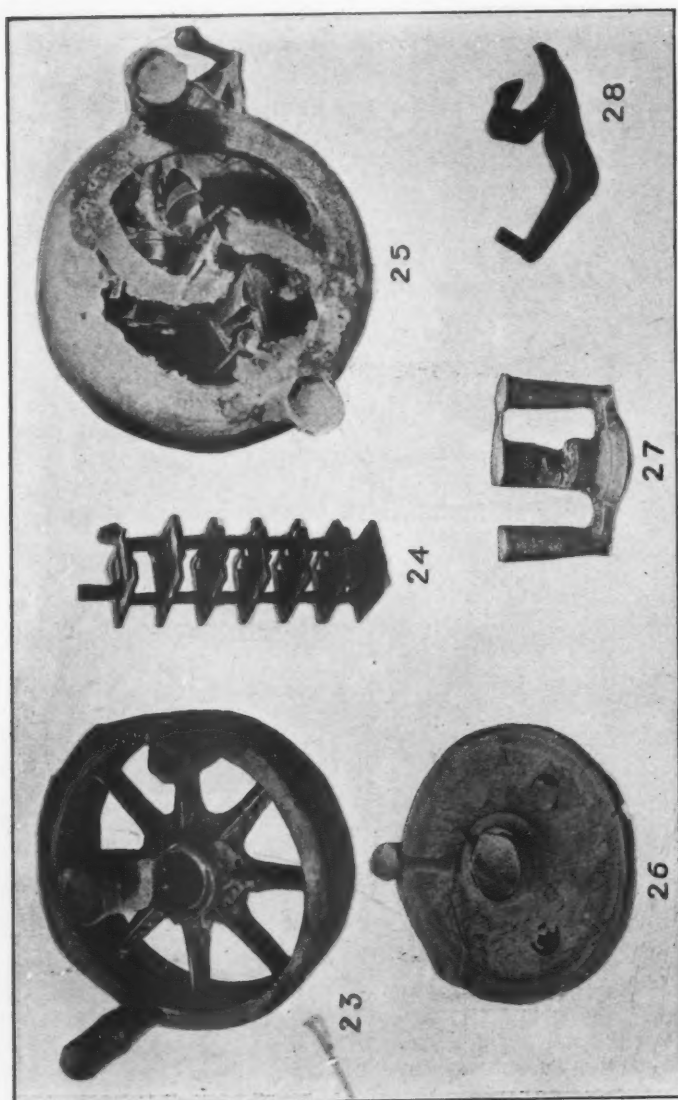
shows a small bevel gear cast with two side heads and one top head. This is a troublesome small casting to handle and the side heads, while not accepted as efficient, answer the purpose at hand.
